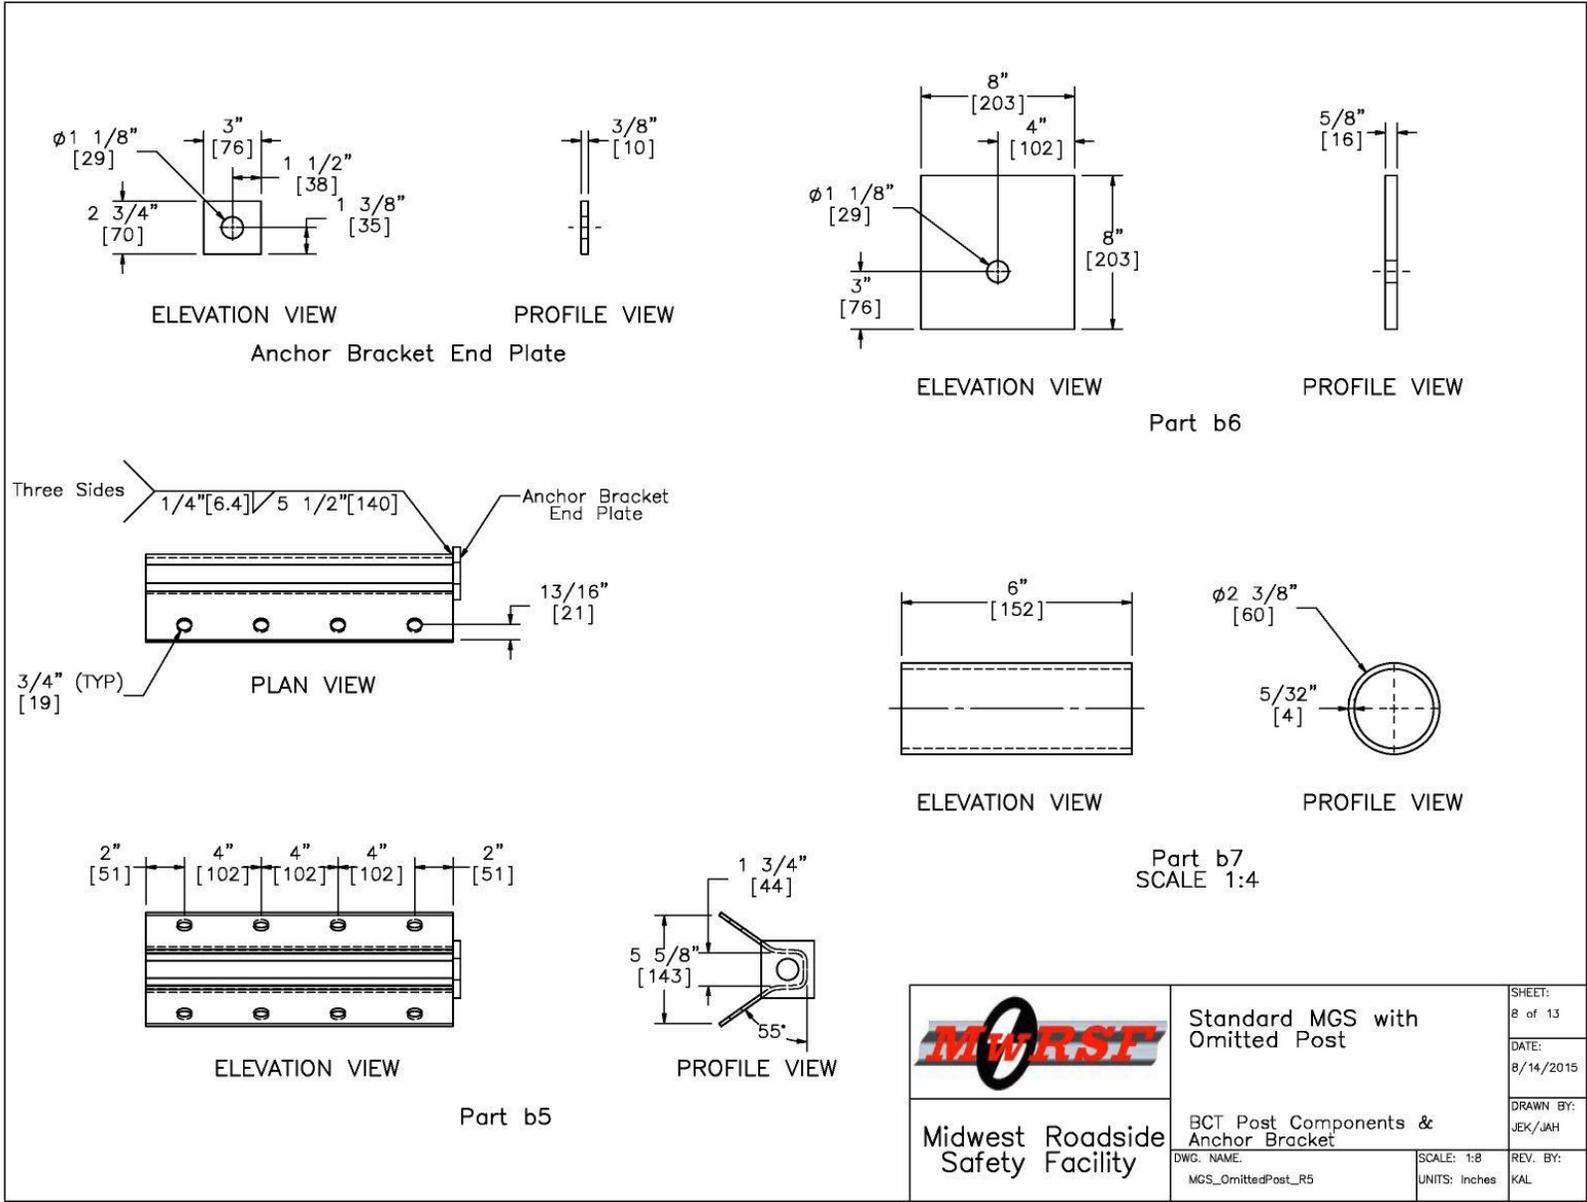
BCT Post Components and Anchor Bracket, Test No. MGSMP-1
